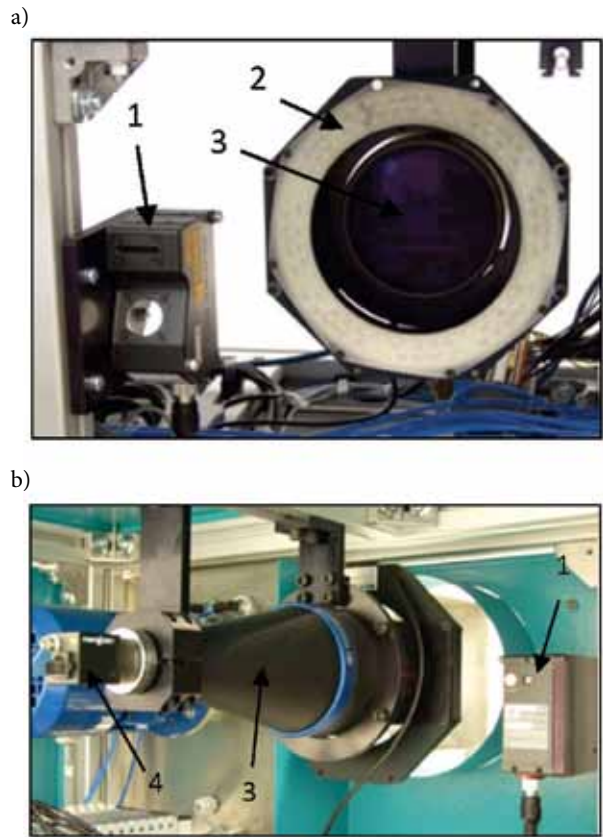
Shaft front inspection module: a) front view, b) rear view; 1 – 2D laser head, 2 – LED ring illuminator, 3 – telecentric lens, 4 – digital camera
